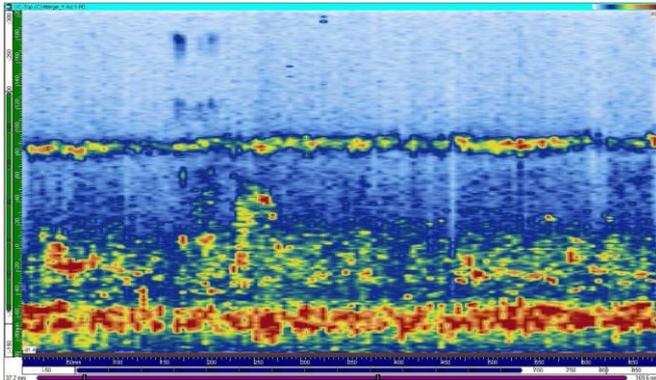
Representation of longitudinal weld joint using ultrasonic phased array test. [8]
